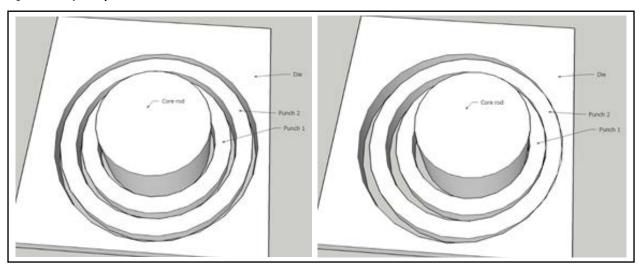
Left: simple tool with concentric part; right: clearances stacked in one direction.
